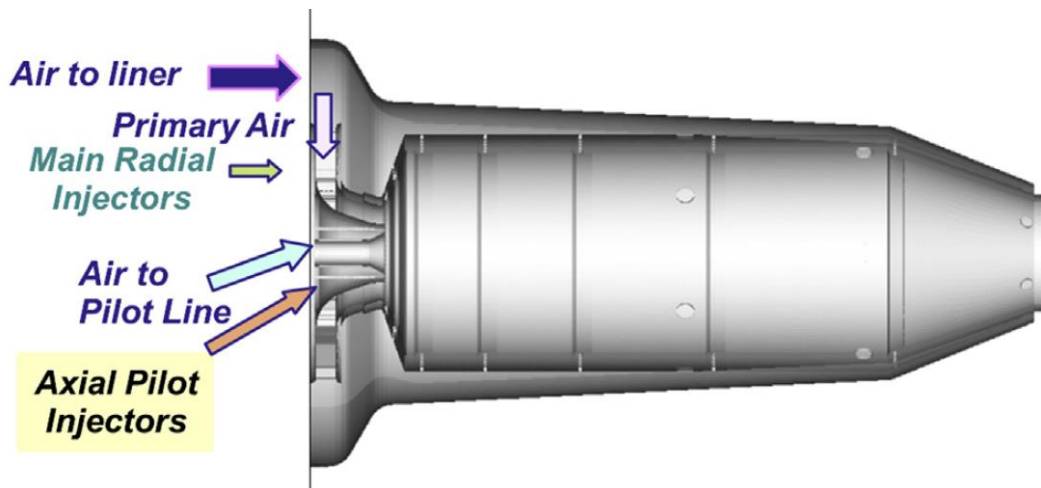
Section view of the combustor chamber (adapted from (Maria Cristina Cameretti, 2013))
